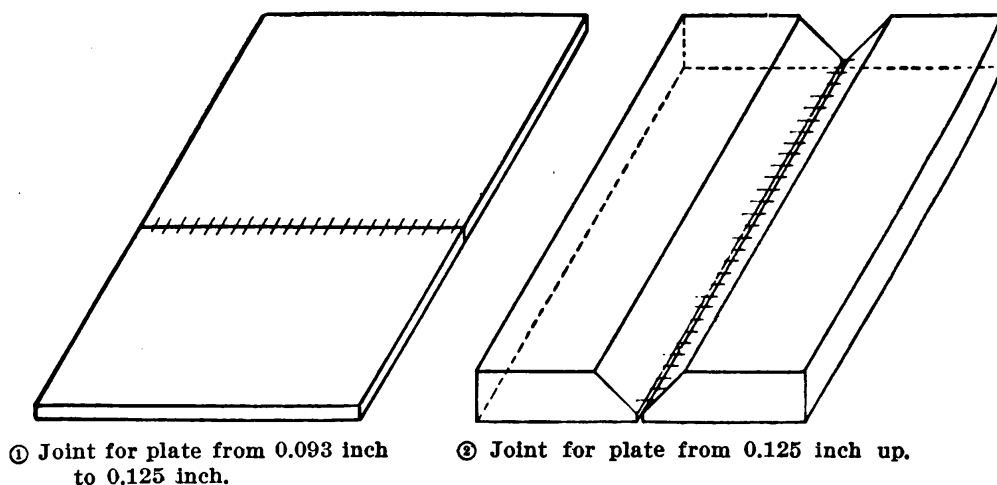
Preparation for welding heavy aluminum sheet and plate.
